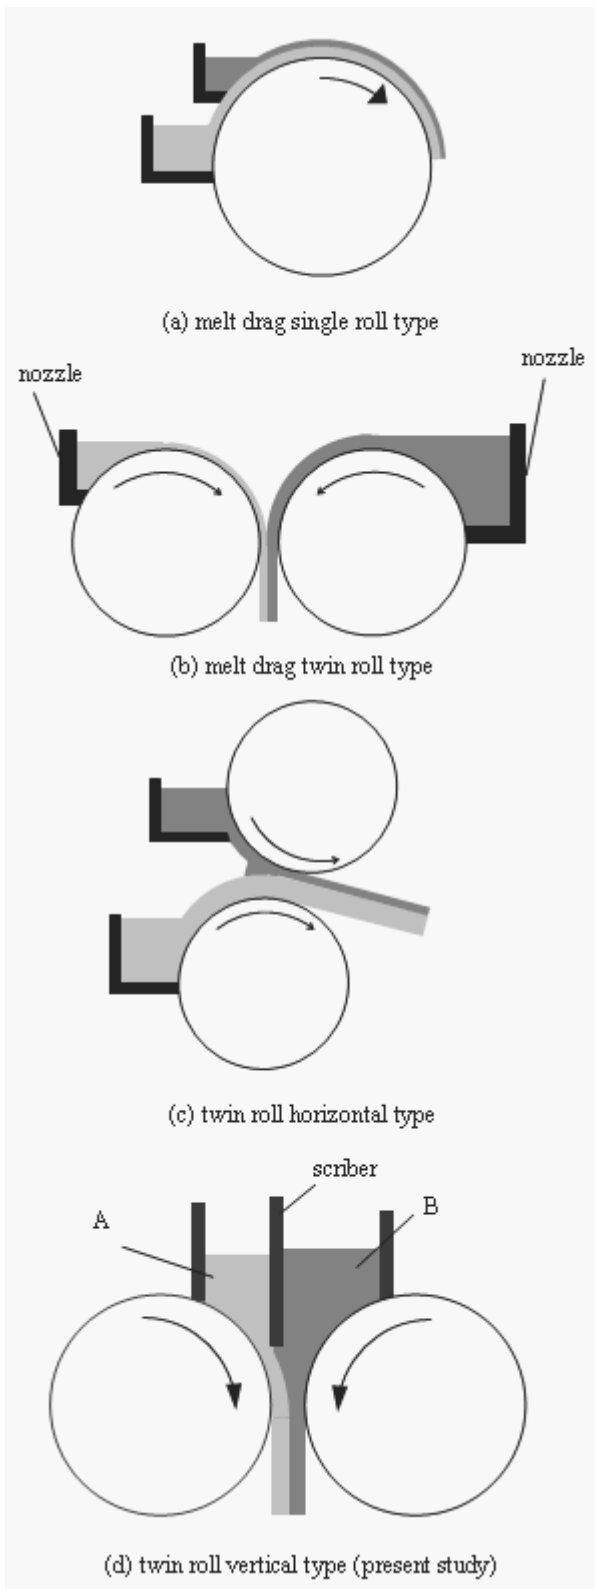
Single roll caster and twin roll caster to cast the clad strips
